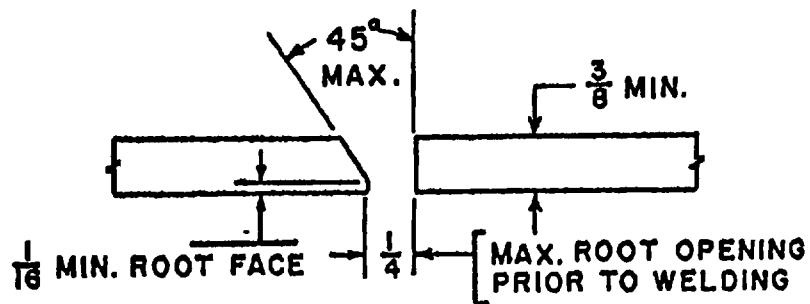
Groove weld test specimen for qualifications of welders or welding operators for plate thickness of 0.5 in. (12.7 mm) or less.
